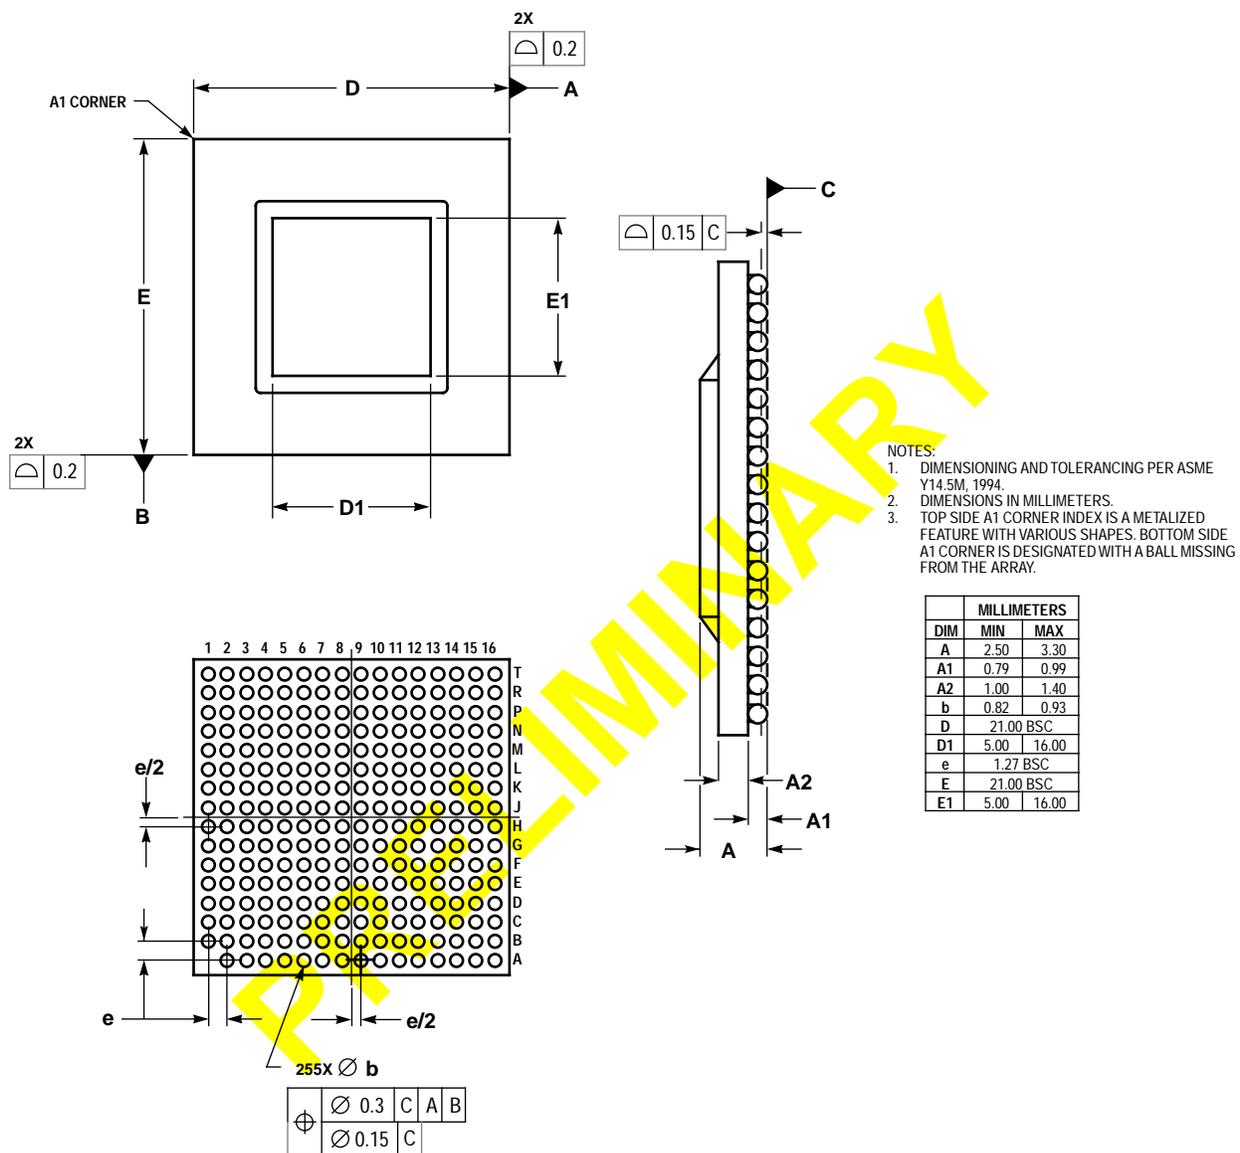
Mechanical Dimensions and Bottom Surface Nomenclature of the BGA Package
